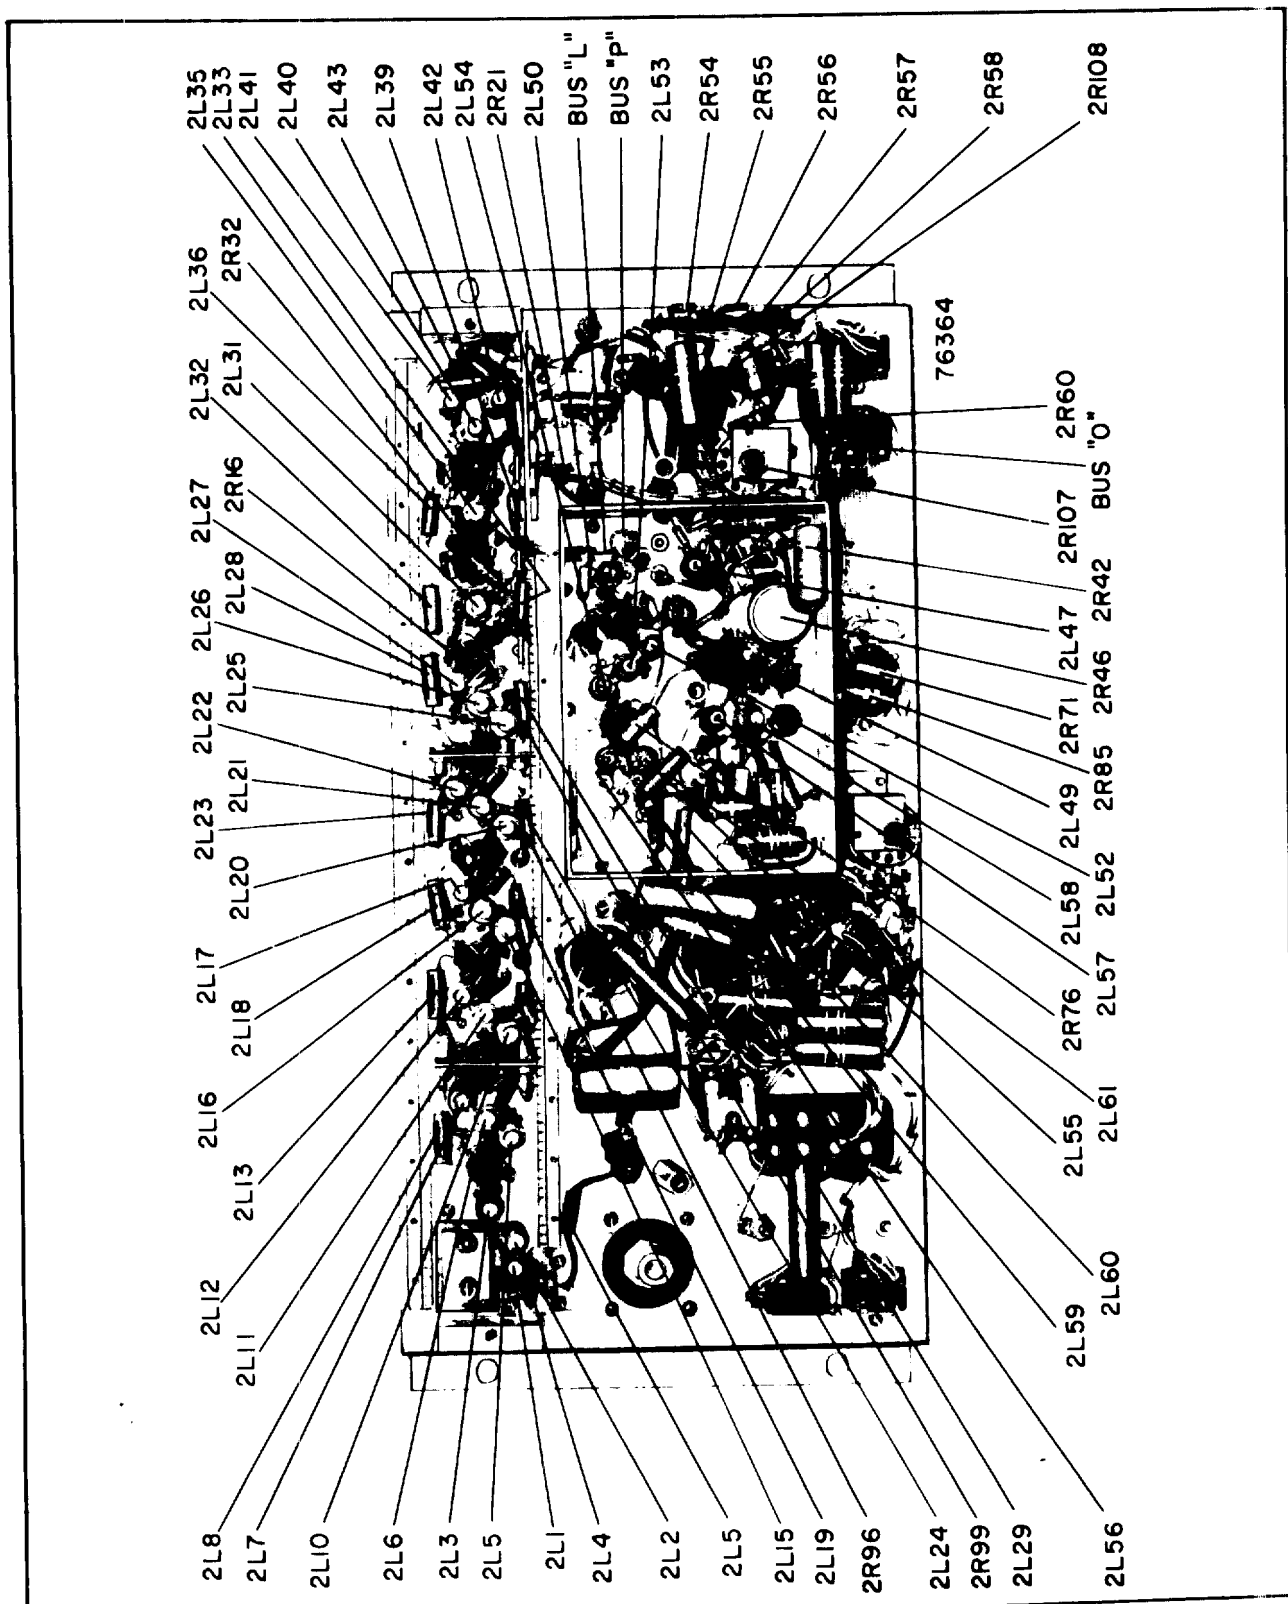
Receiver/Modulator, MI-31102-A—Rear View, Dust Cover and Shield Covers Removed
